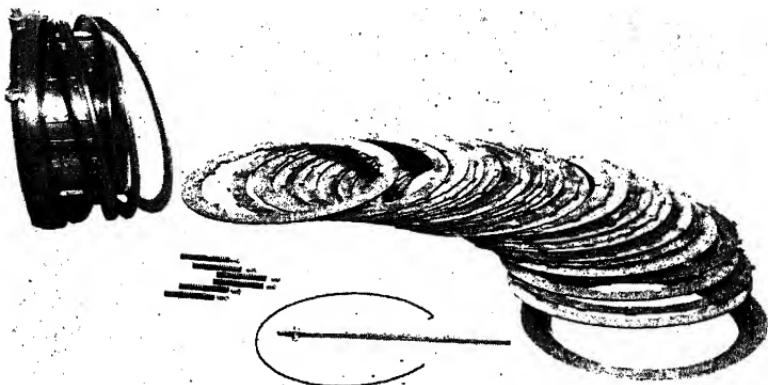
Brake rings and carrier for Goodyear brakes.
